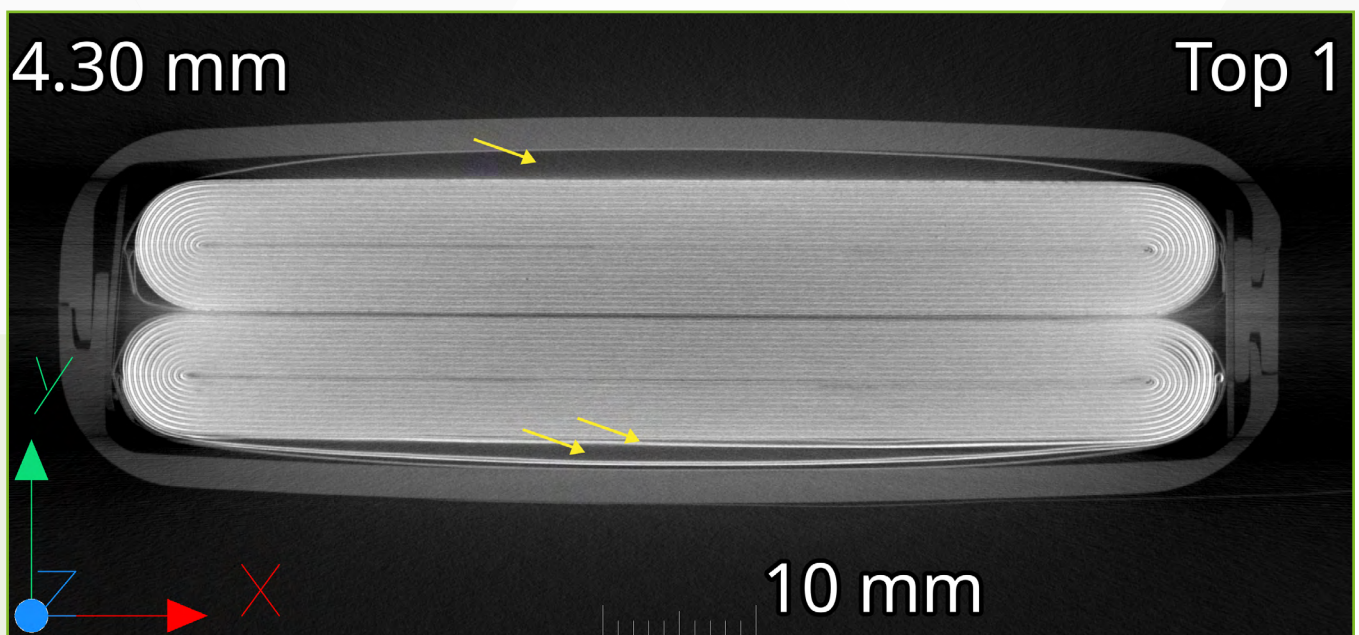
Tomographic cross-section of a damaged battery with two prismatic cells. The upper cell shows swelling of the casing. The lower cell shows delamination of the two outer electrode layers. The swollen areas are marked.
